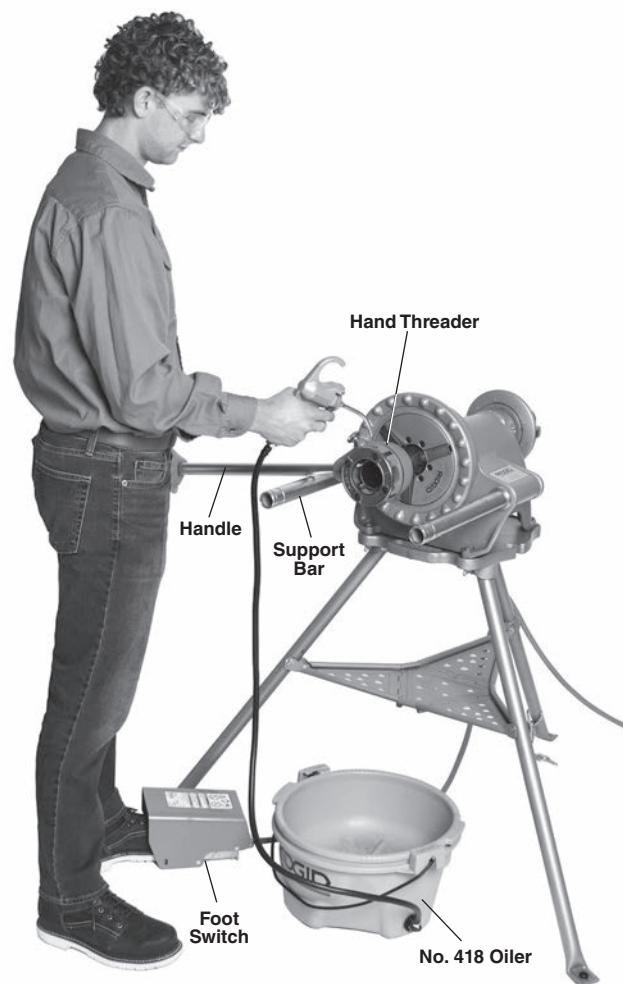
Threading with Manual Threaders/Proper Operating Position (Keep Threader Handle in Contact with Support Bar.)
